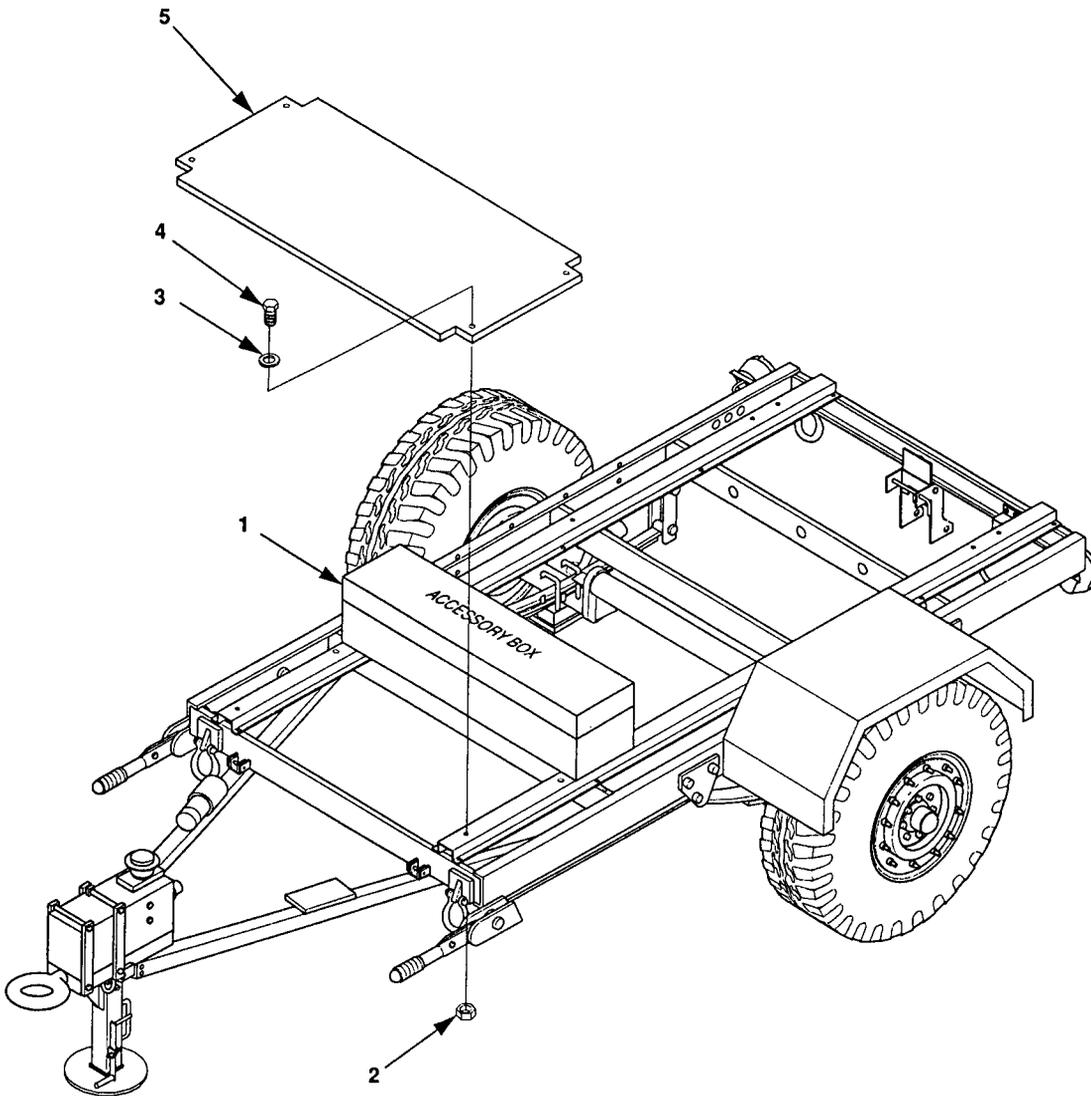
Front Platform Replacement, 1 Ton Trailer.
